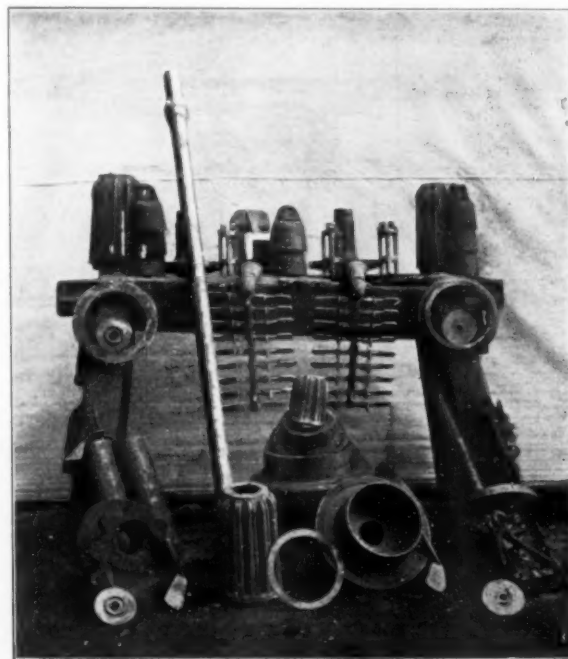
HIGH TENSION INSULATOR CASTING OF MONEL METAL.
